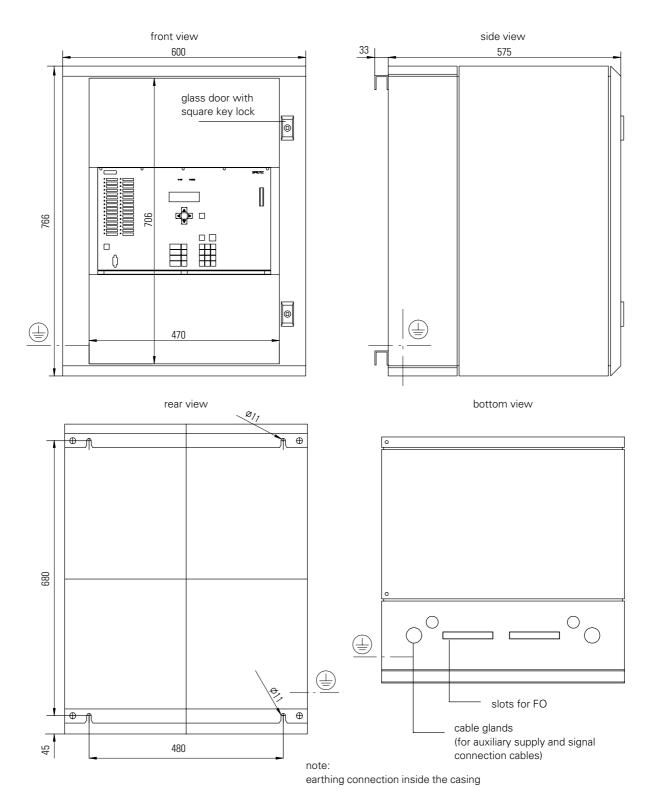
Mechanical dimensions of the surface-mounted casing
